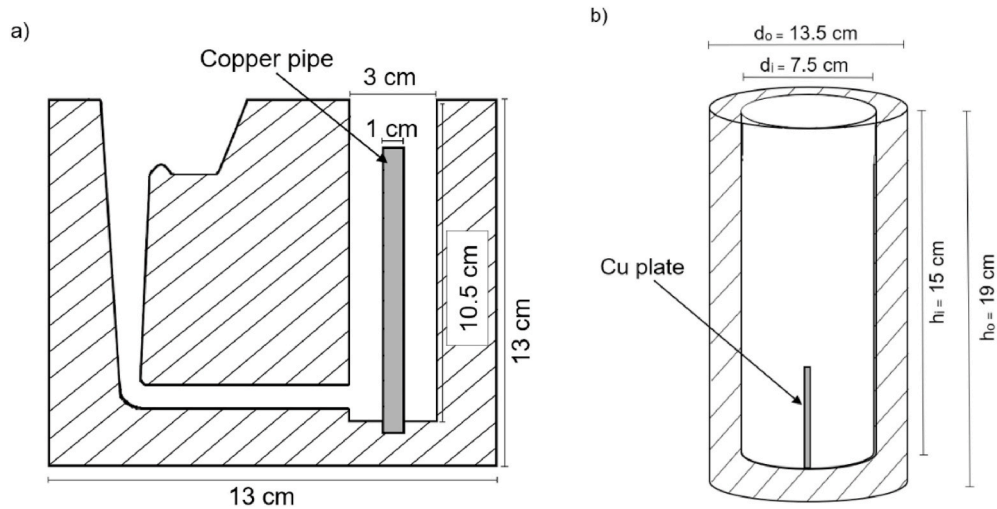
Sketch and dimensions of the casting molds. a) Graphite mold with copper pipe inserts, b) Copper mold with copper plate inserts.
